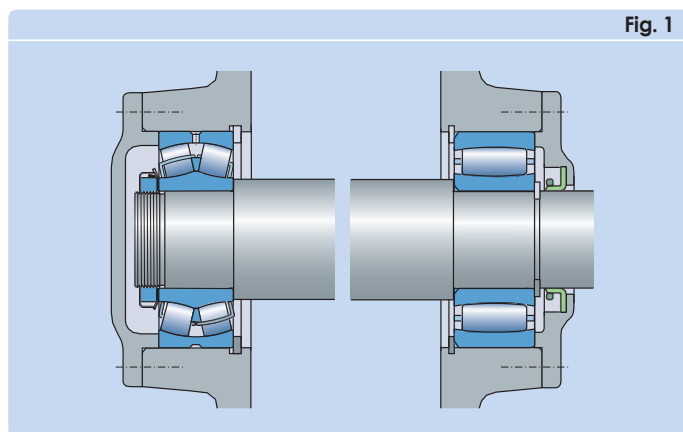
VKE self-aligning bearing system with a self-aligning ball bearing in the locating position and a CARB toroidal roller bearing in the non-locating position
